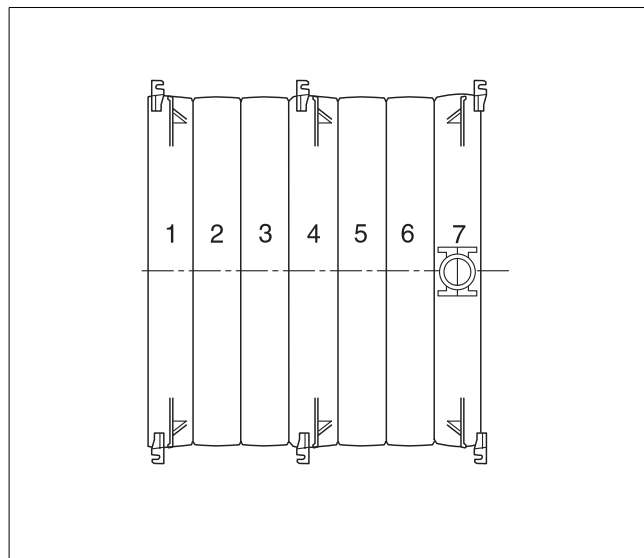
Plan view of boiler block (7 sections) showing brackets
